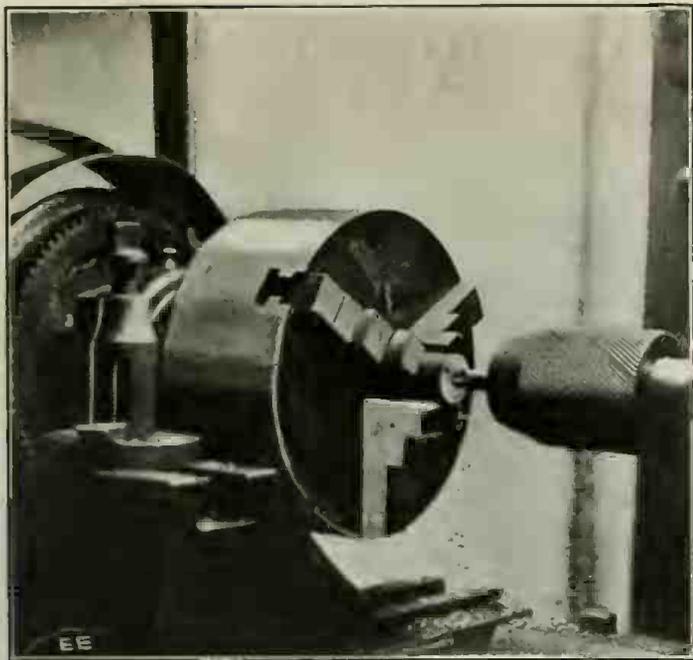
Illustrating How the End of a Shaft is Exactly and Quickly Centered By Means of a "Centering Drill" Held in a Hand-Chuck Mounted in the Tail-Stock Spindle of the Lathe. If no Centering Drill is Available, an Ordinary Twist Drill, Ground to the Proper Angle, is Used in Many Shops.
